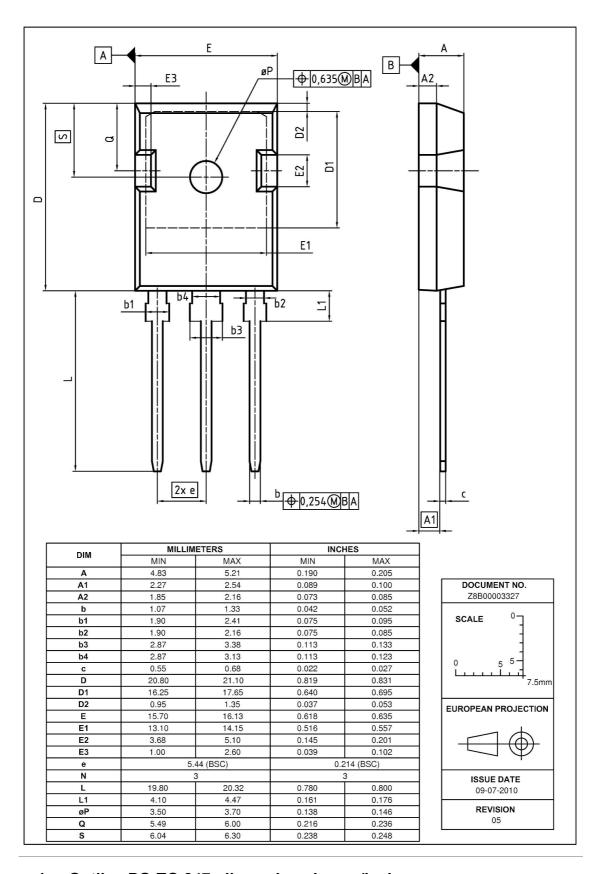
Outline PG-TO 247, dimensions in mm/inches
